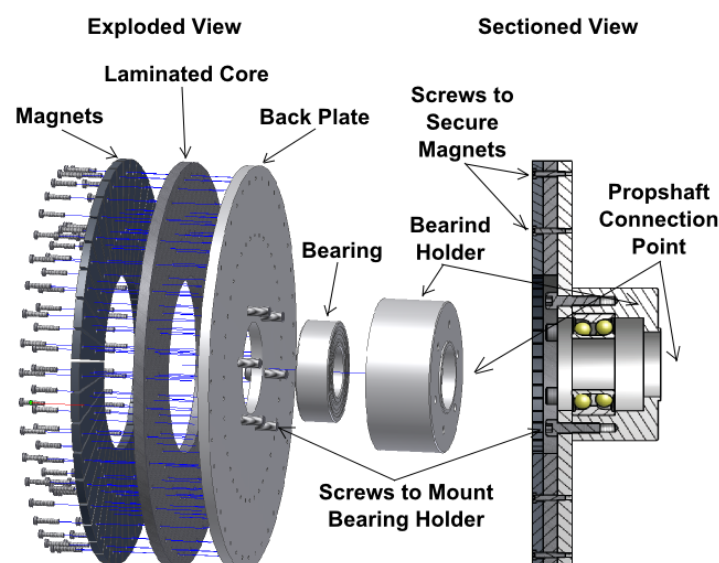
Low-Speed Rotor with Exploded and Sectioned Views
